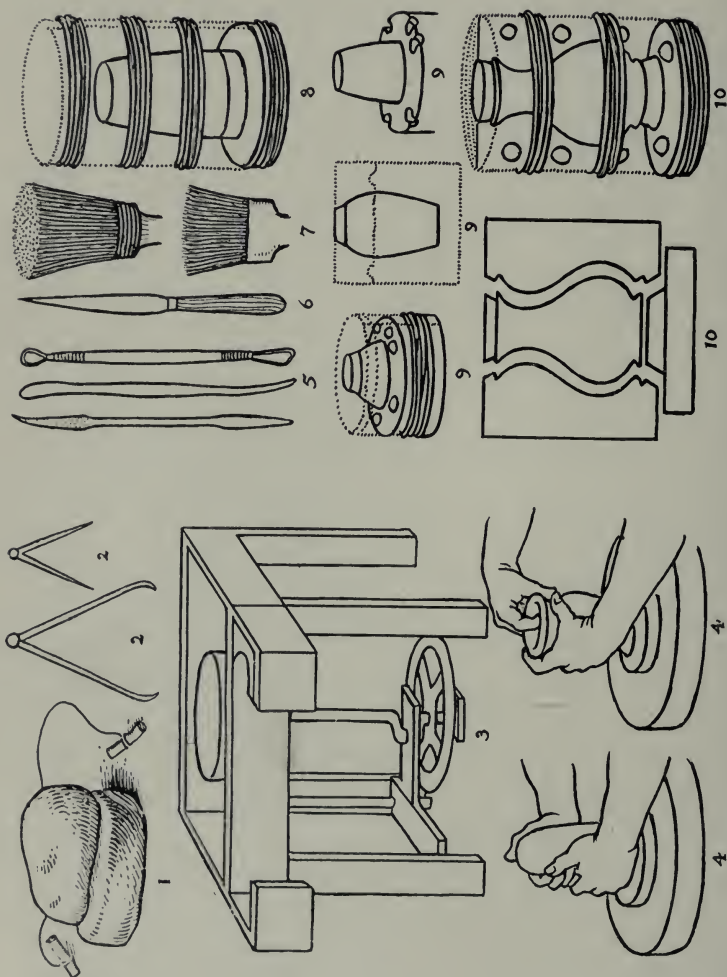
1, Wedged Clay with Wire Cutter; 2, Callipers and Compasses; 3, Side-throwing Wheel; 4, Throwing; 5, Modelling Tools; 6, Knife; 7, Round and Flat Brushes; 8, One-piece Mould; 9, Two-piece Mould; 10, Three-piece Mould.
